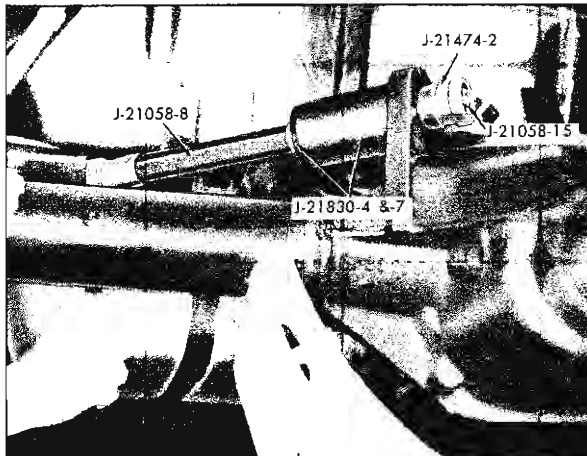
Carrier Mounted Suspension Bushing Removal (Light-Duty)
